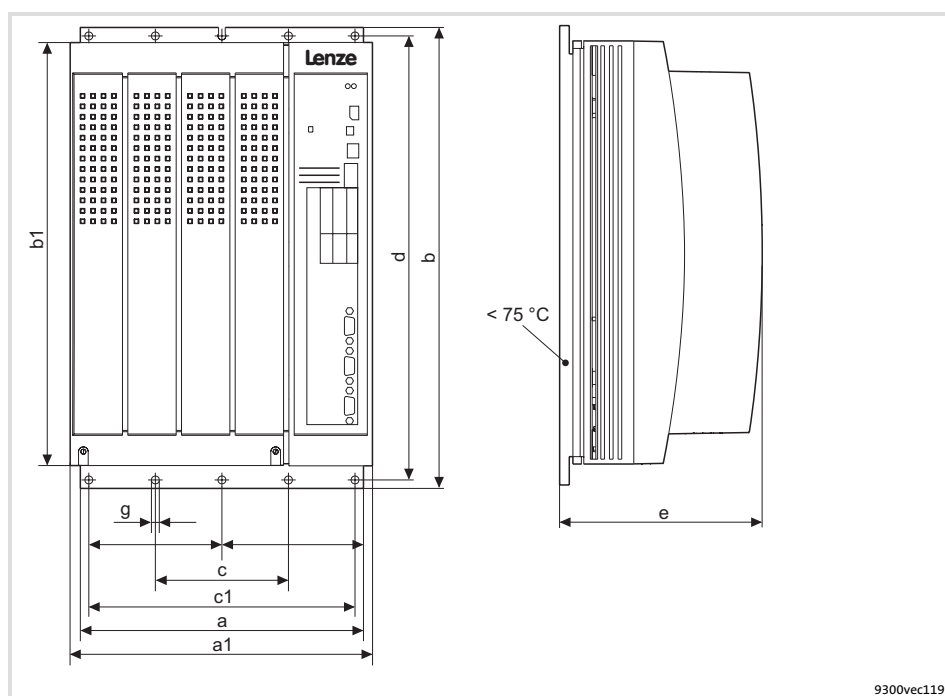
Dimensions for mounting in "cold plate" technique 15 ... 22 kW
